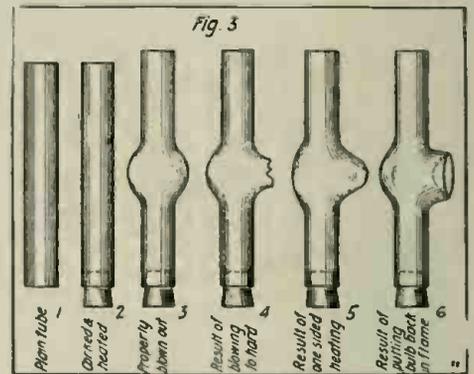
This Illustration Shows the Various Stages Gone Thru in Heating a Glass Tube for the Purpose of Enlarging it at a Given Point.
